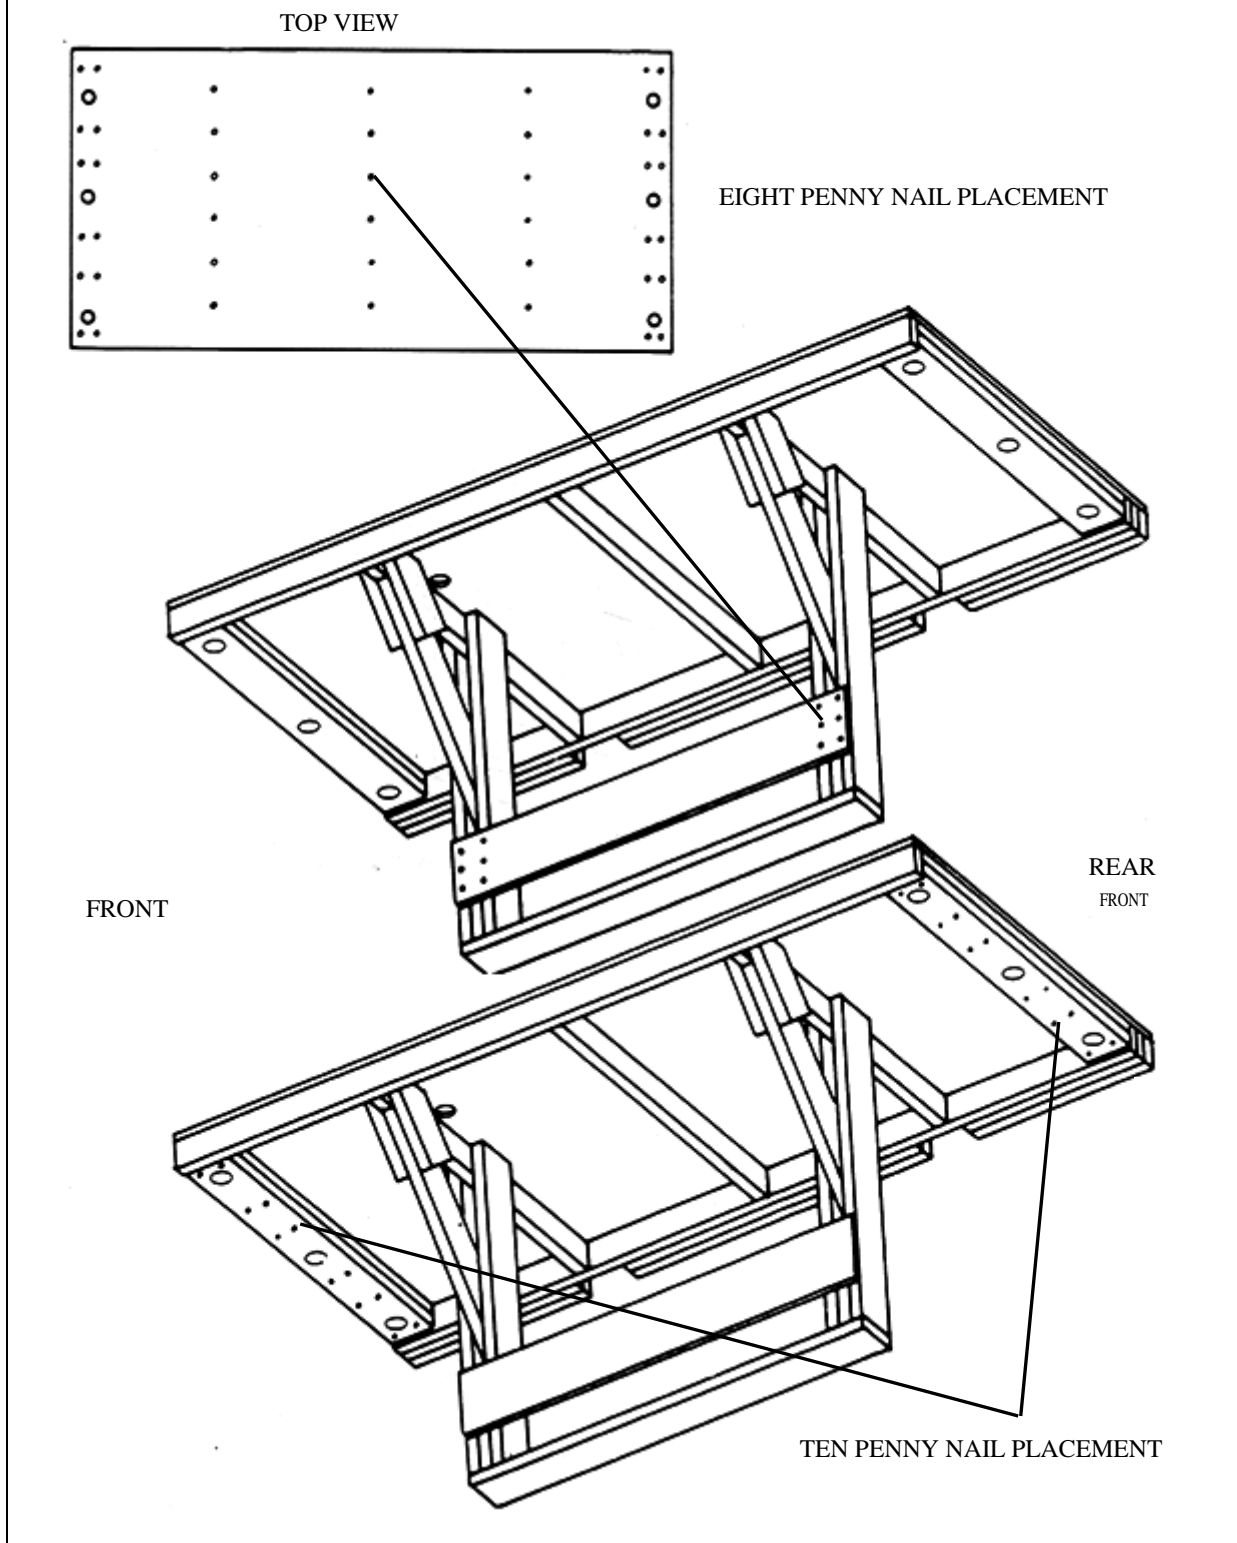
Parachute Stowage Platform Constructed (Continued)
